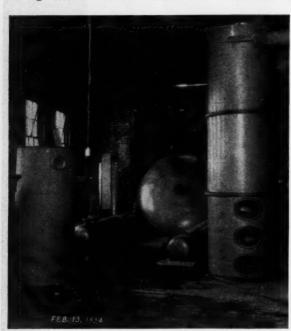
By using arc welding in the construction of this copper distillery equipment, many hours were saved.
